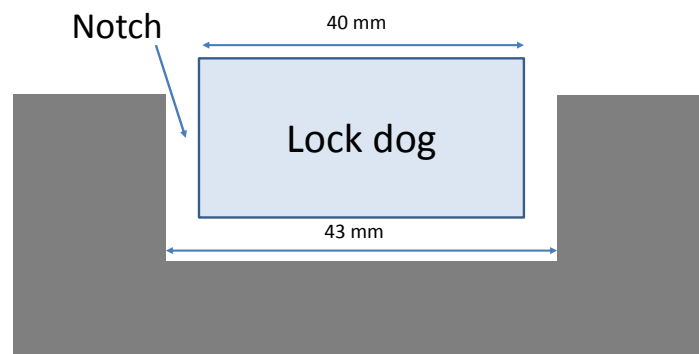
A mechanical locking mechanism implemented inside a point machine
